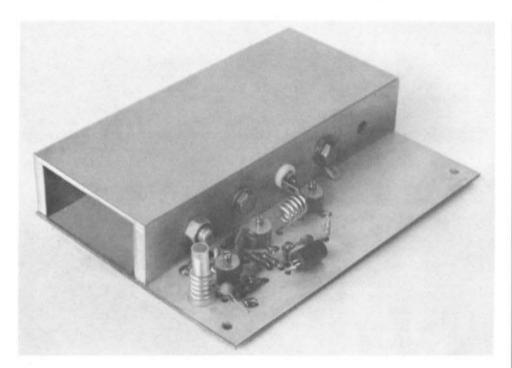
A voltage stabilizer or a remote-feeding filter can be mounted on the free-surface of the PC-board
